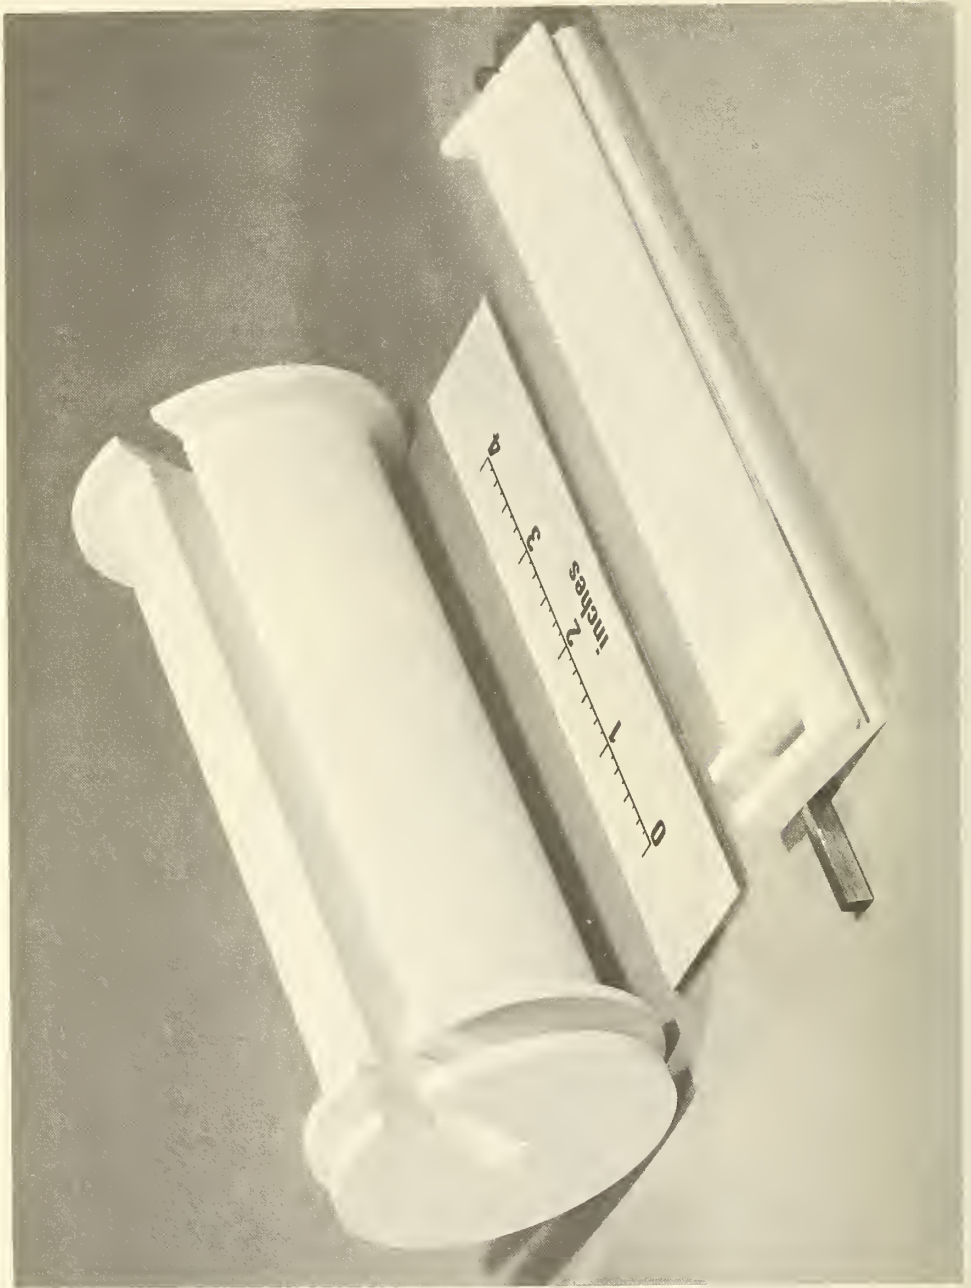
Exploded View of the Boron Nitride Heat Distributor.
